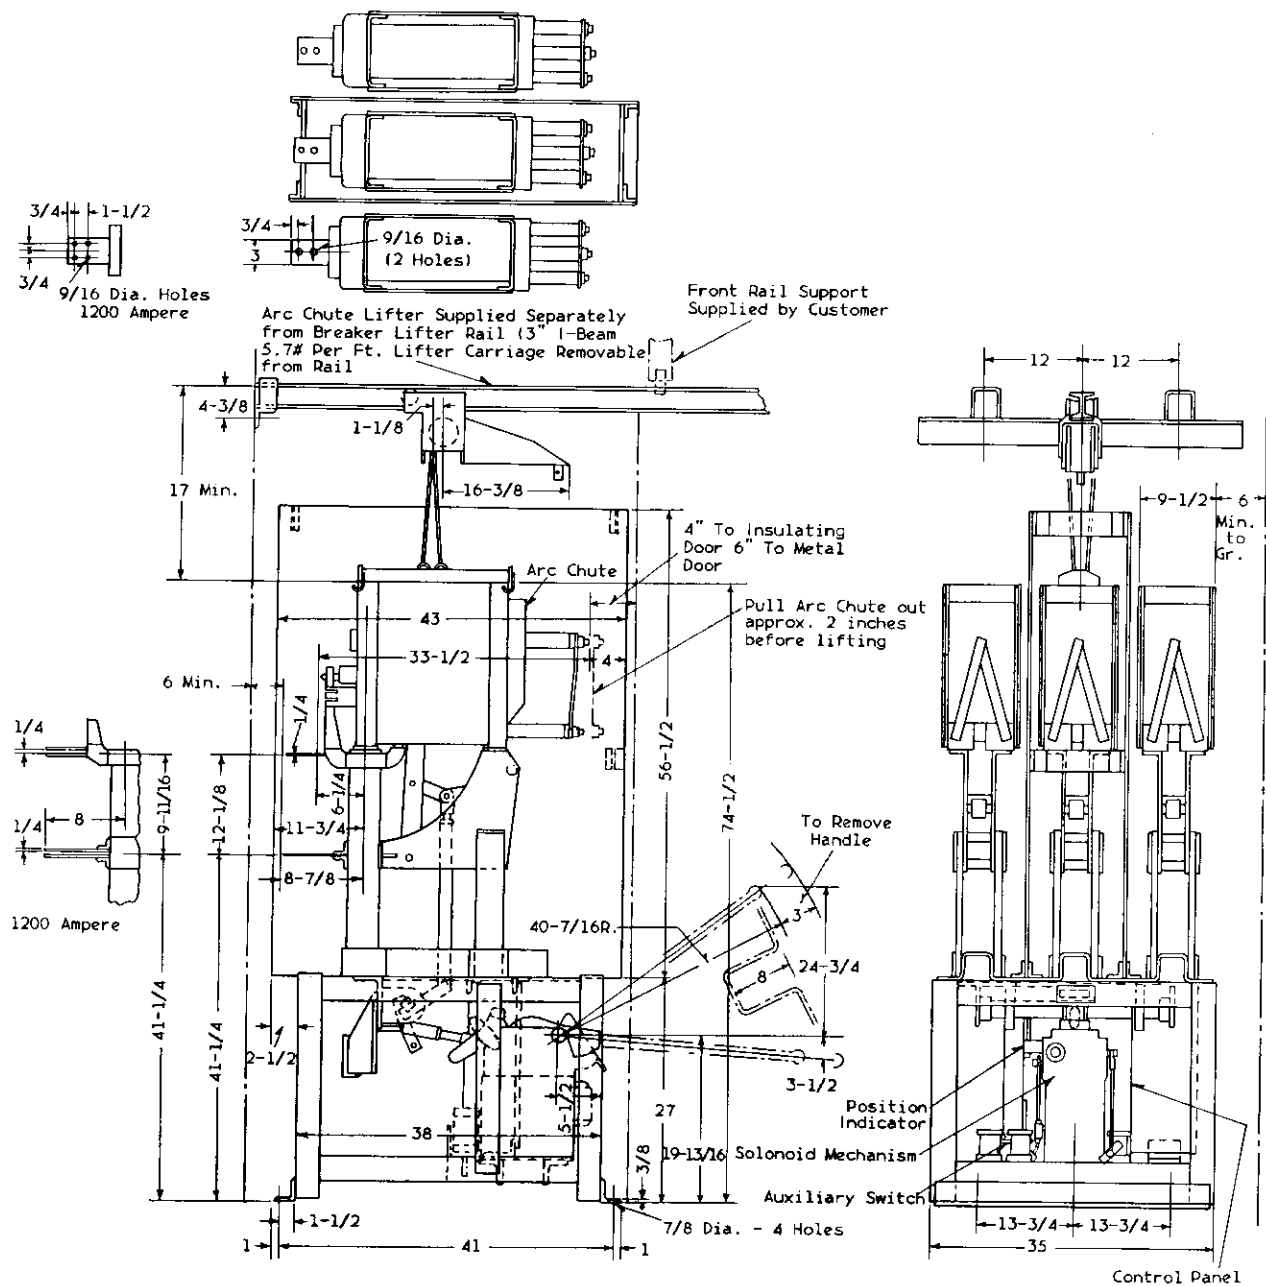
OUTLINE DIMENSIONS OF TYPE 150-U-12, 3-POLE, "DE-ION" AIR CIRCUIT BREAKER
